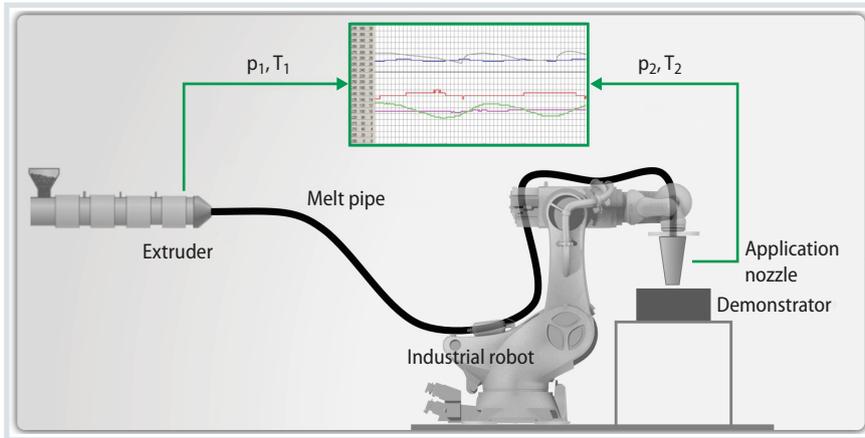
The extruder is coupled to a flexible melt pipe with the print head fixed on the industrial robot © Fraunhofer IWU
